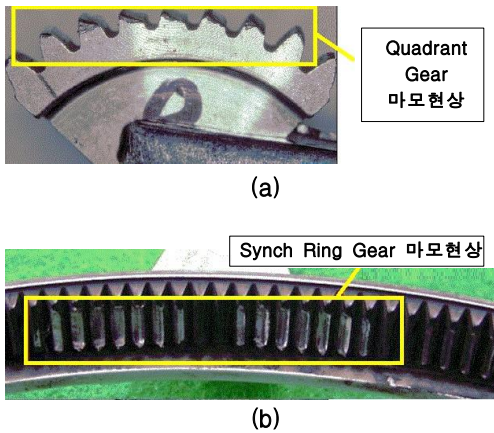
Gears Wear (a)Quadrant Gear (b) Synchronus Ring Gear
